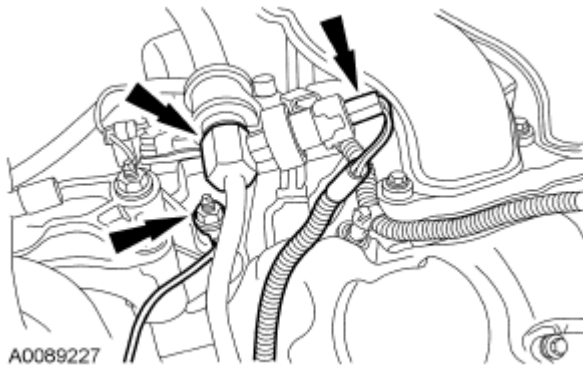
Locating Ground Wire & PSP Hose Bracket
